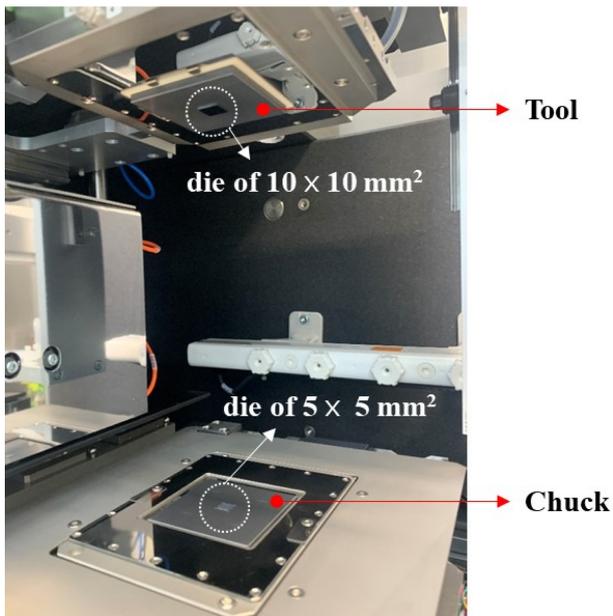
Picture of die laminated with DAF mounted on chuck and die loaded on tool.
